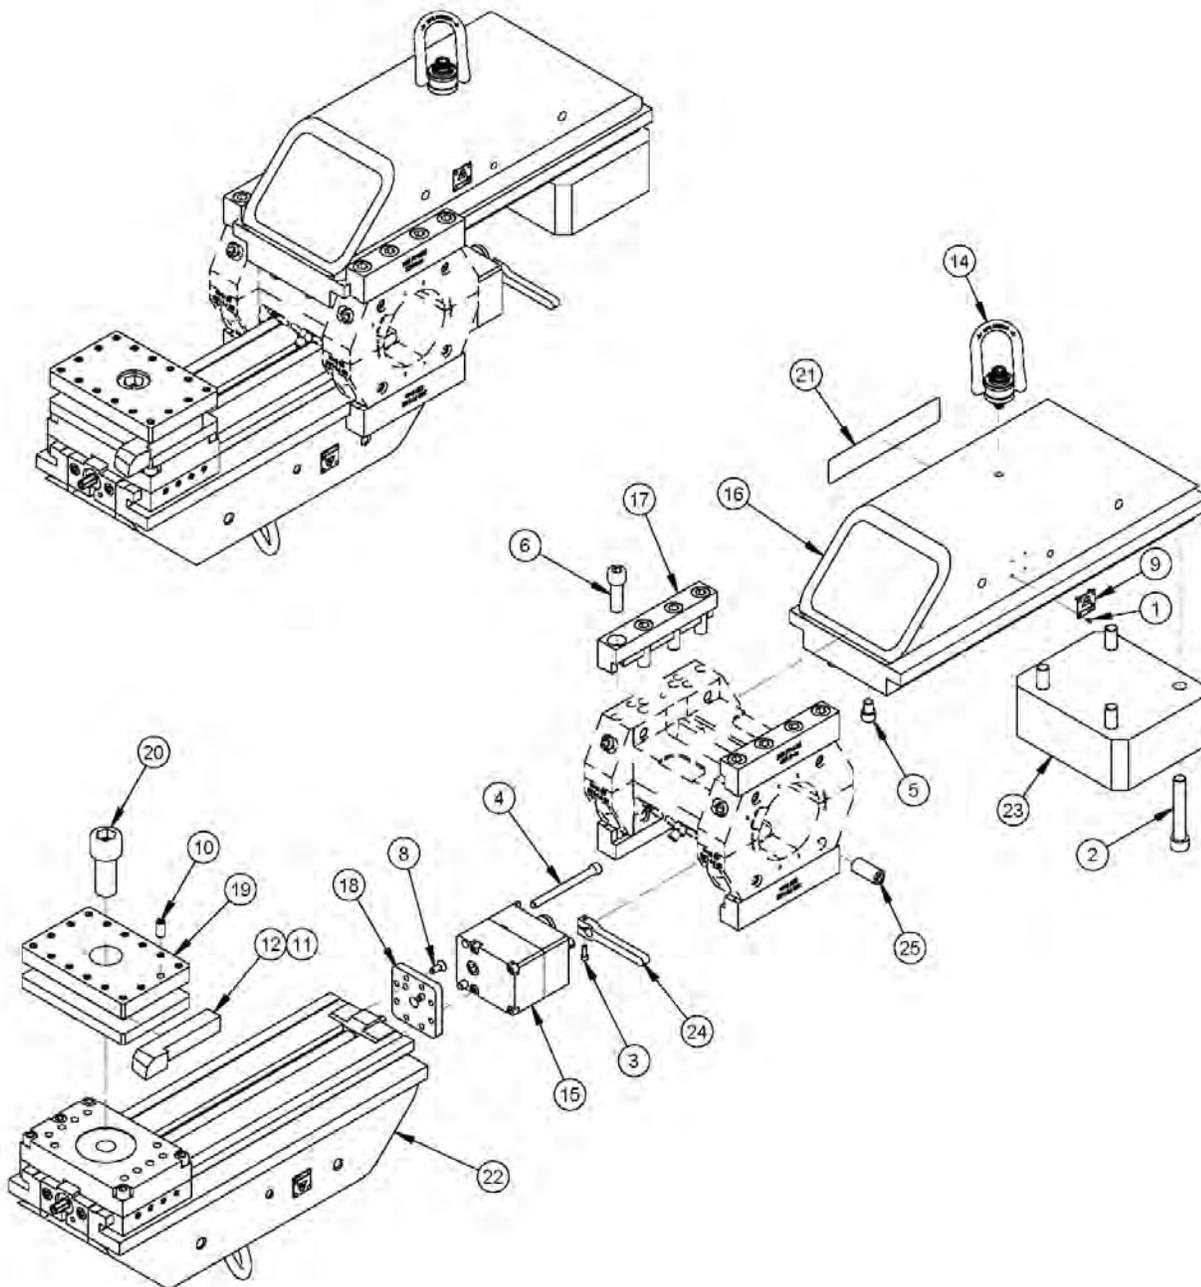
FACING HEAD CHART ASSEMBLY (P/N 75682)
